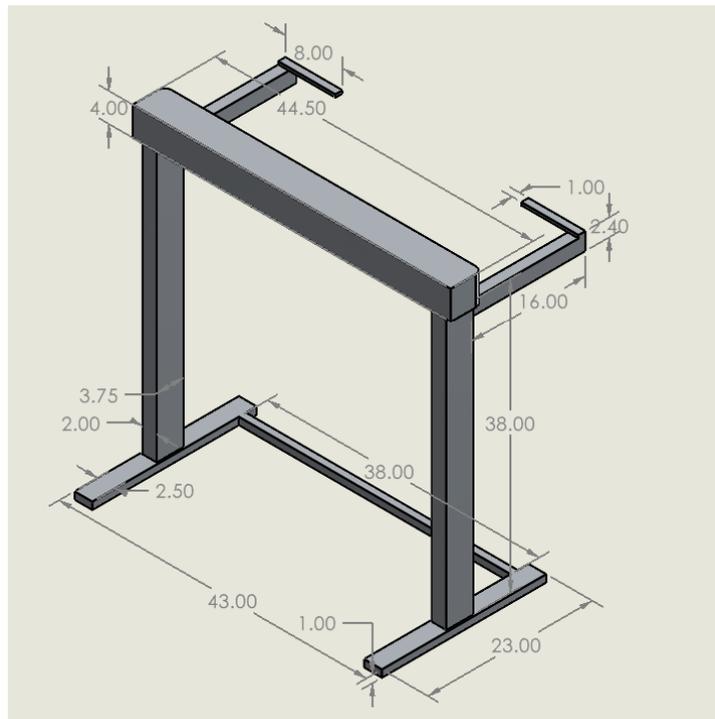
SolidWorks Model of Final Prototype with Dimensions in Inches
